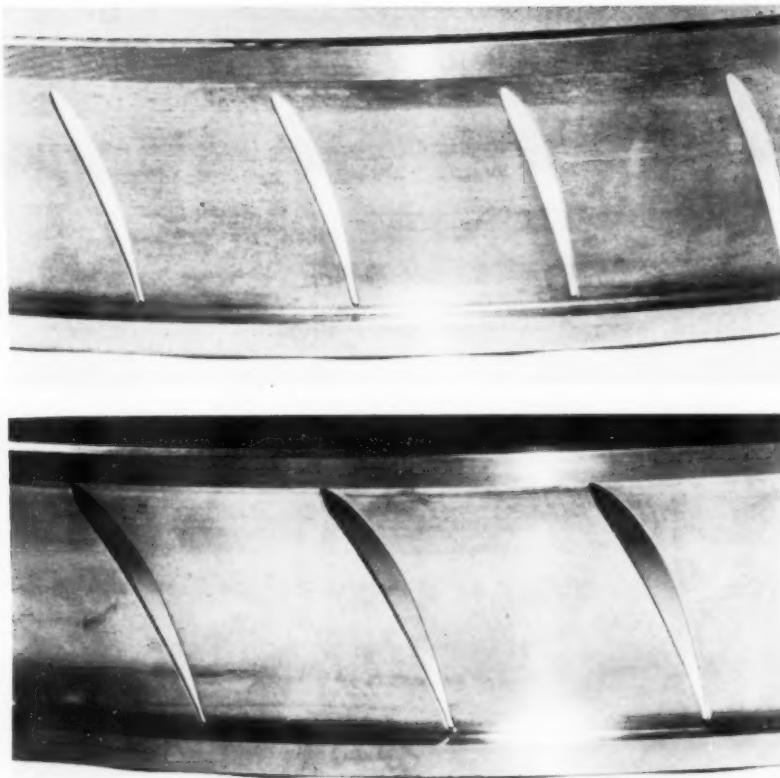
Parts were brushed to obtain the desired surface finish and remove tool marks. Conditions of before brushing (top) and after brushing (bottom) are illustrated.
